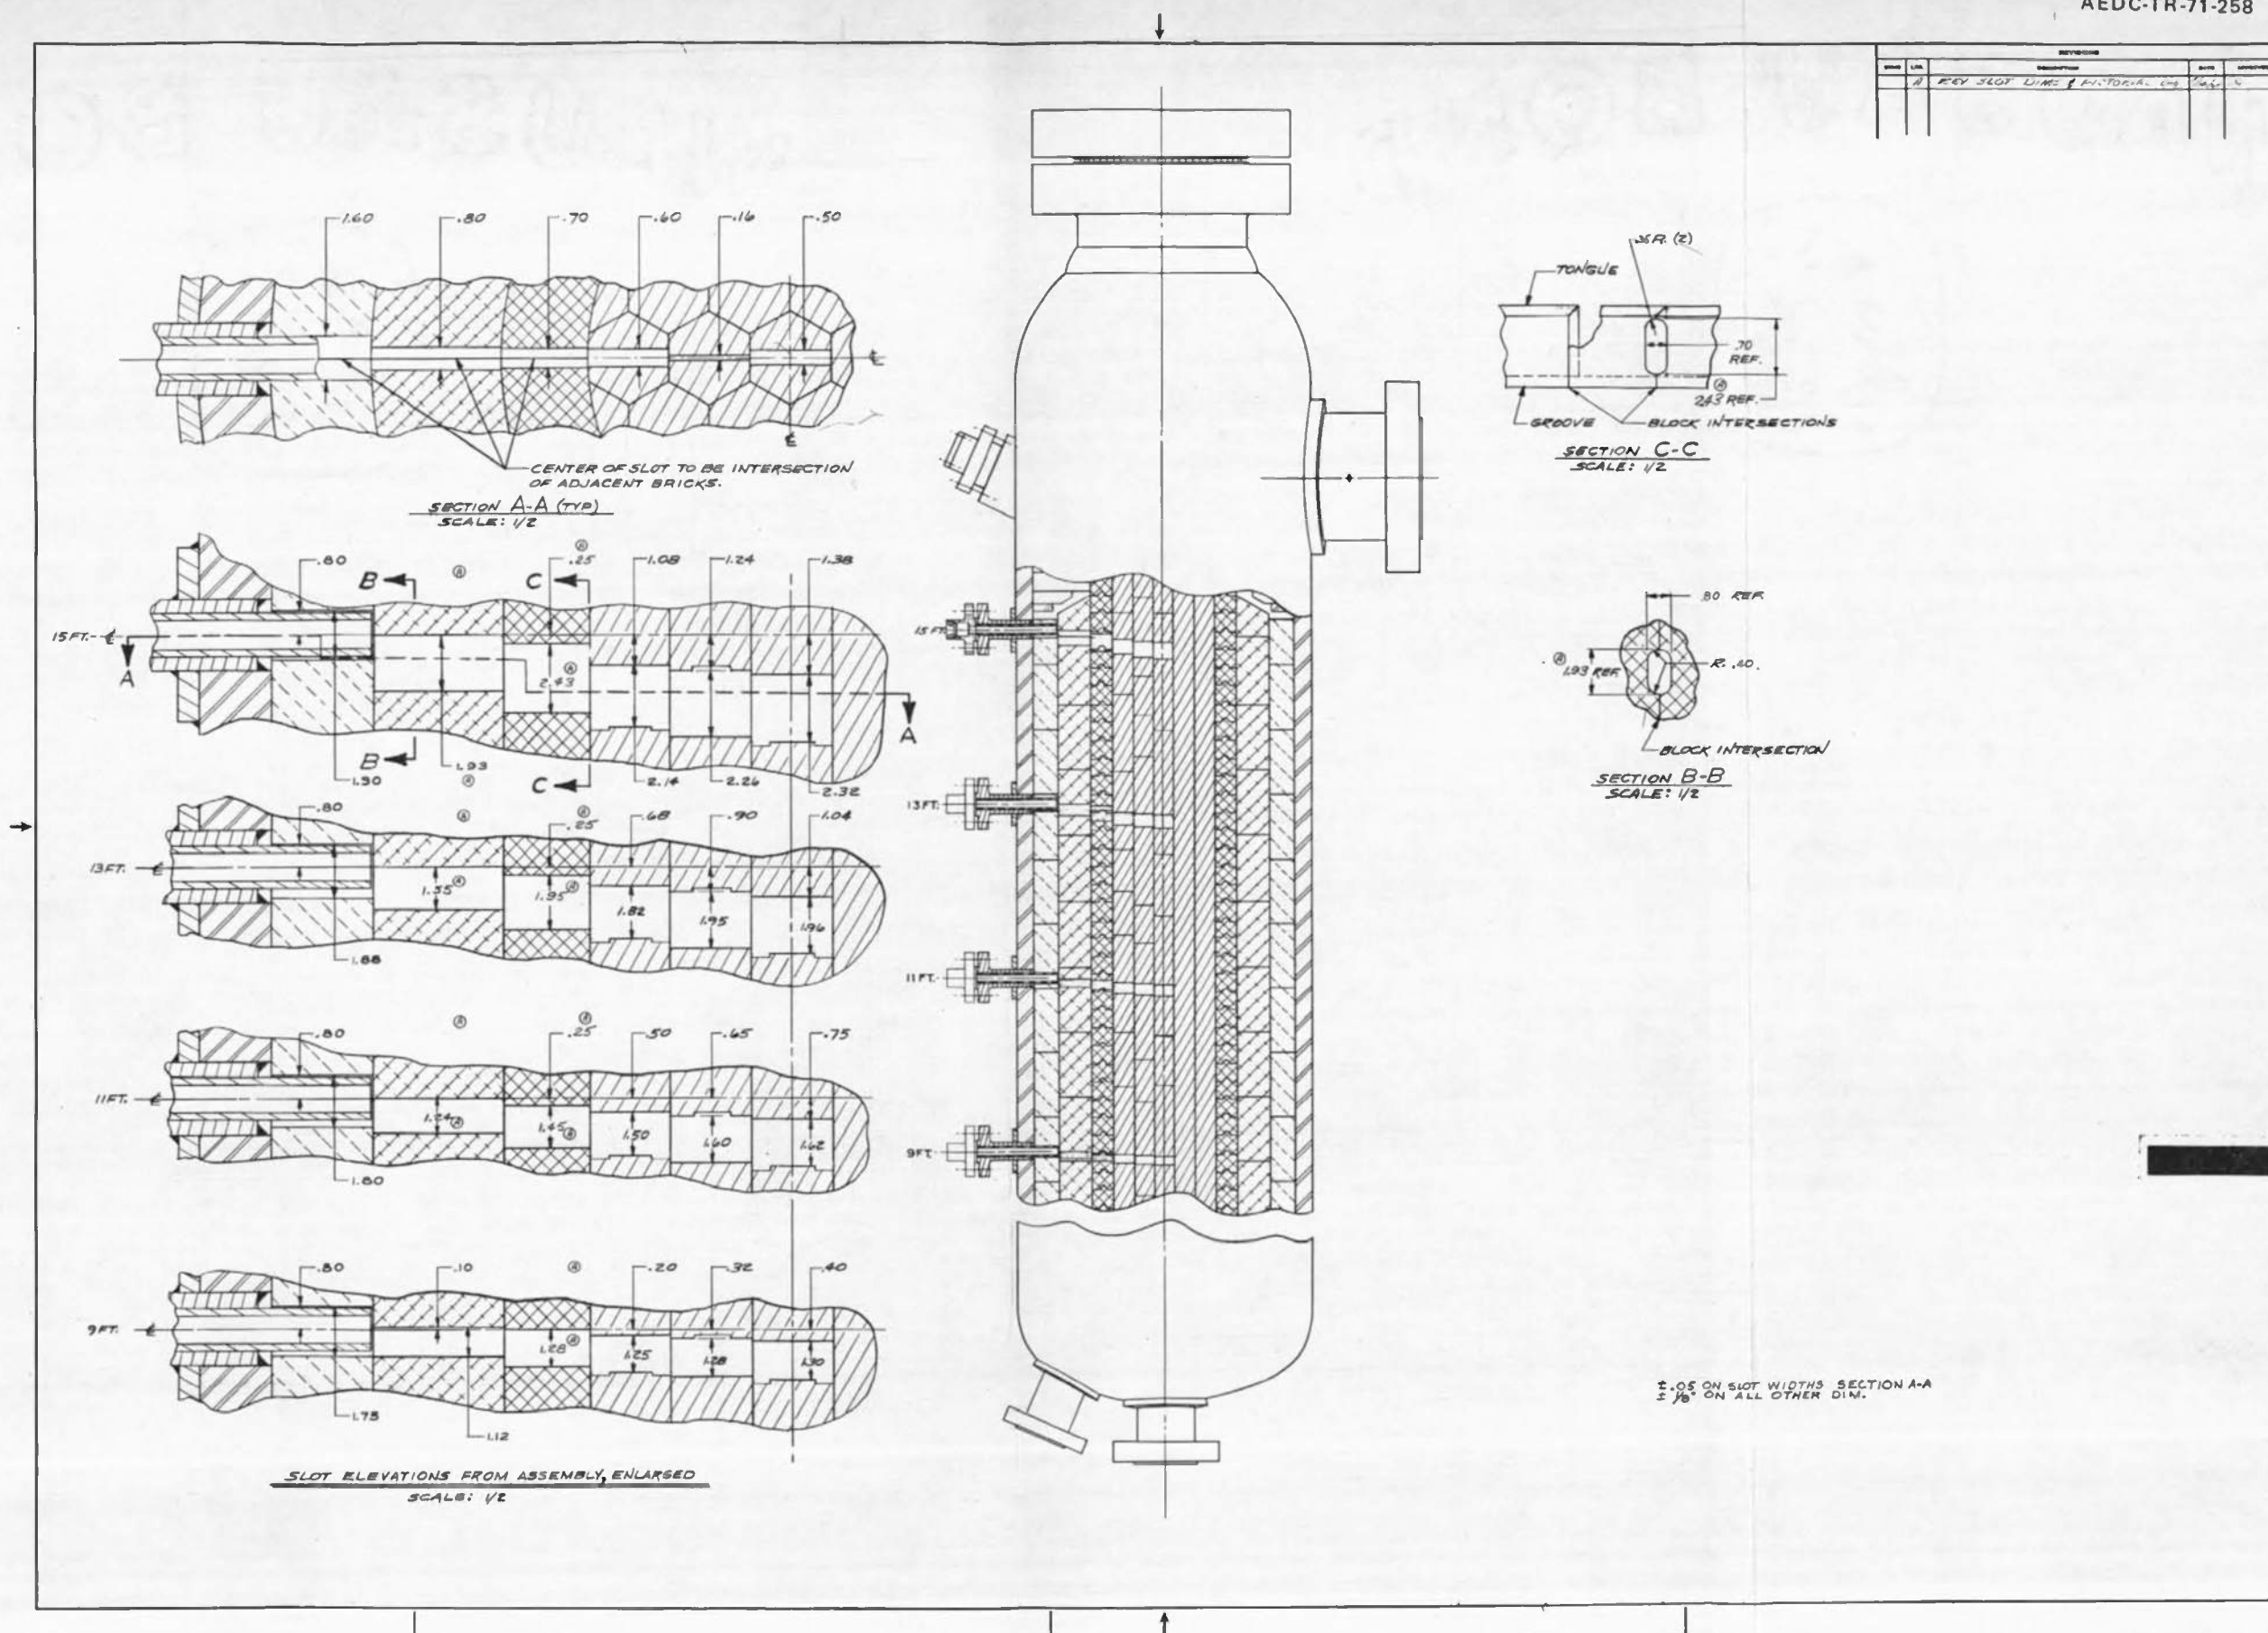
PYROMETER SIGHT HOLE ASSEMBLY - PILOT HEATER
